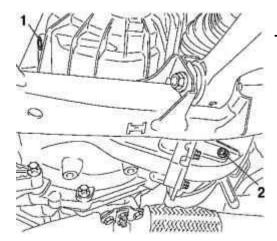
Drain transmission oil: 1 control bolt; 2 - bolt to drain
